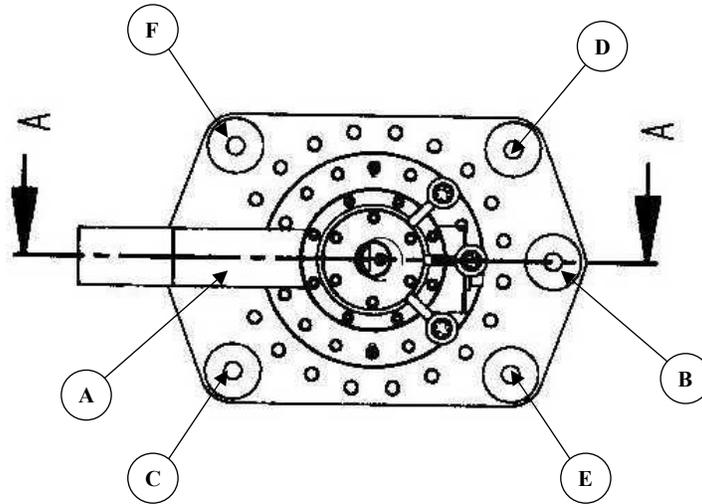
The specified sequence for tightening the Belleville washer assemblies.
